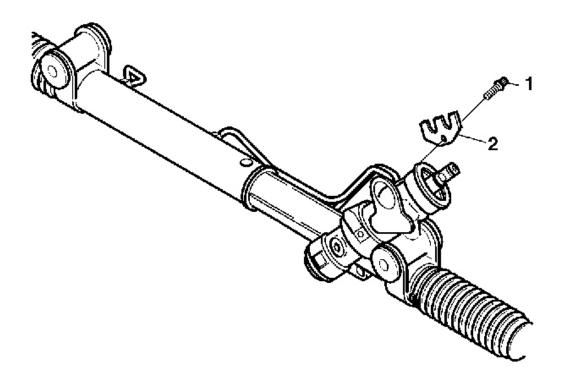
Removing Cylinder Line Retaining Plate Courtesy of GENERAL MOTORS CORP.
